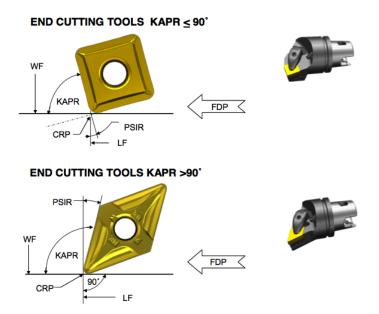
Cutting Tool Measurement Diagram 5 (Cutting Item – ISO 13399)
